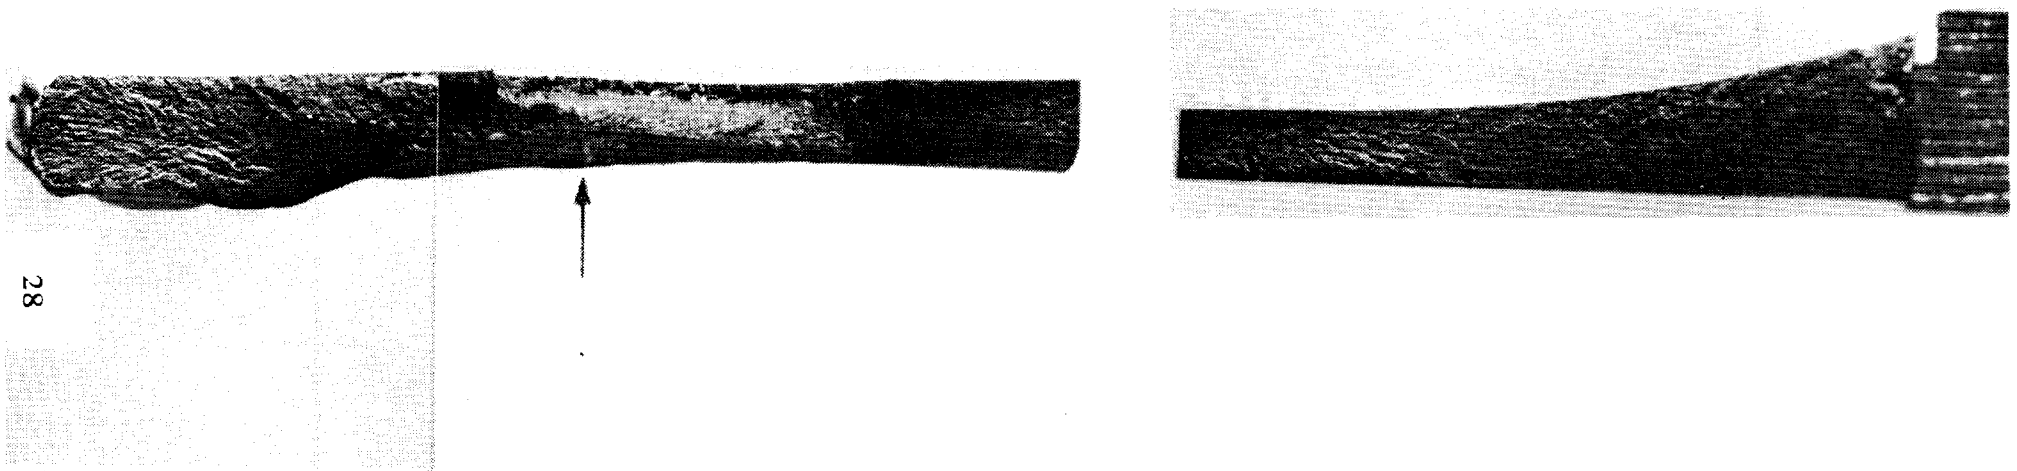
Photo montage showing fracture faces A and C. Arrow indicates fracture origin, as highlighted by chevron patterns and river markings. Mag. 2x.
